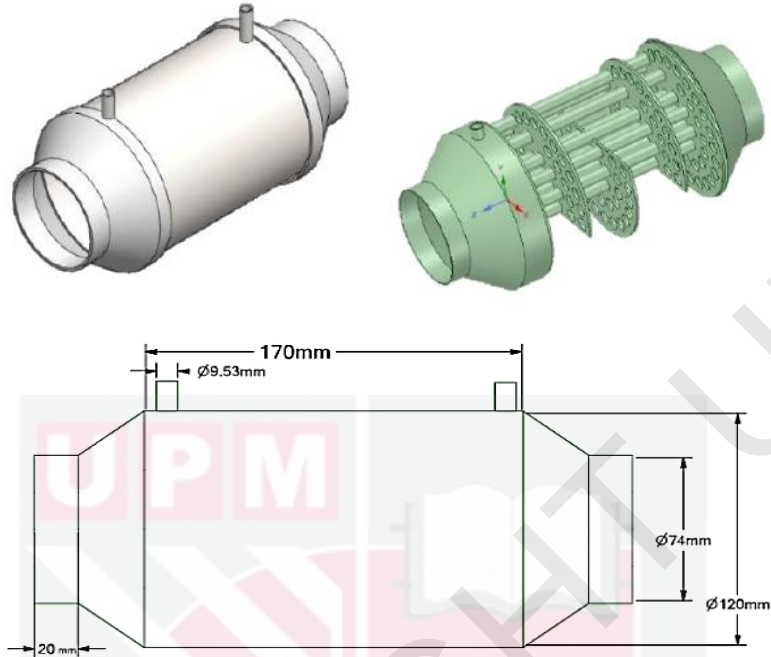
Geometry and dimensions of shell and tube heat exchanger
